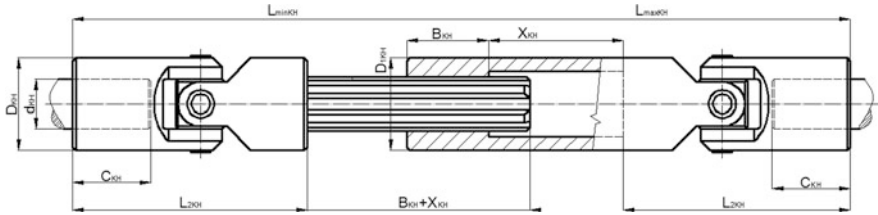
Telescopic universal joints shaft 4GA05 according DIN 808
